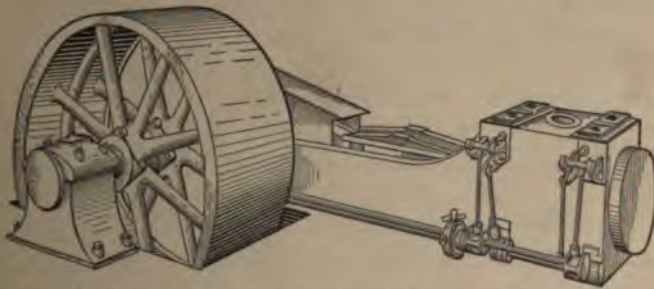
Medium-Speed Engine — Shaft Governor — Positive Cut-off.
